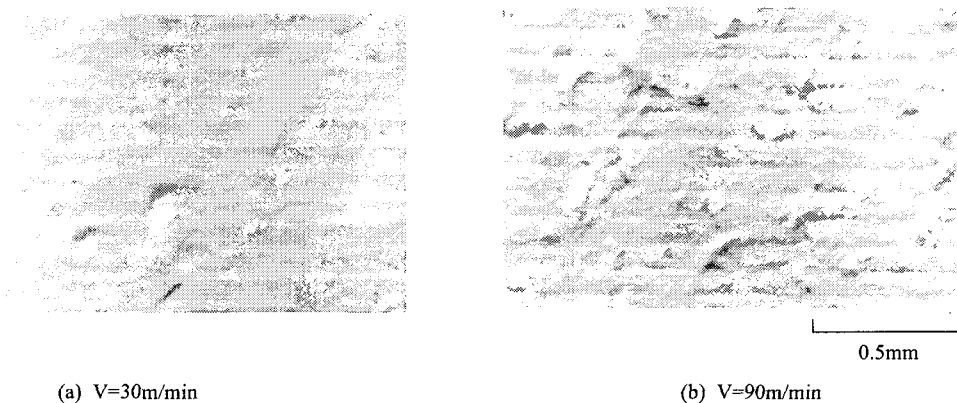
Photographs of surface turned with cermet tool at different cutting speeds
